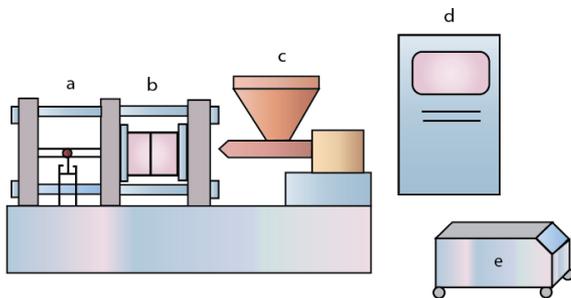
Sections of an injection molding machine: a) Clamping unit; b) Molding unit; c) Plastication unit; d) Control panel; e) Temperature controlsystem [12].
